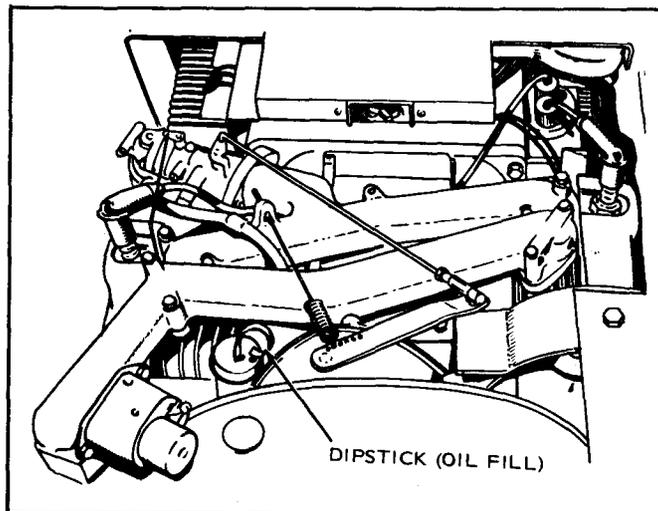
DIPSTICK LOCATION (TOP VIEW)
